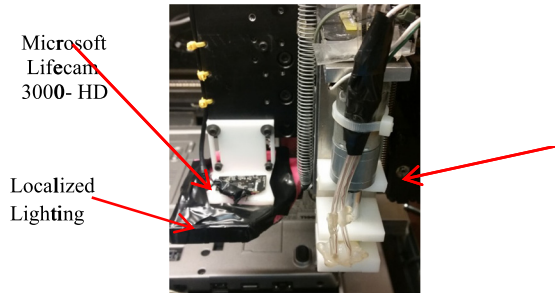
Disassembly module consisting of the SE screwdriver tool, webcam, and localized lighting.
